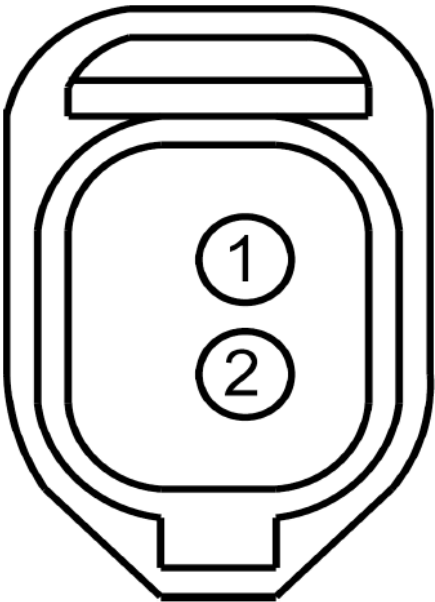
Right Rear Lamp Assembly Connector End View (C417B)
